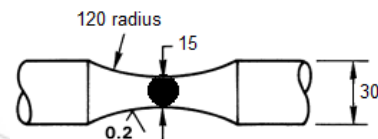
Specimen of fatigue test (all dimensions are in mm).
